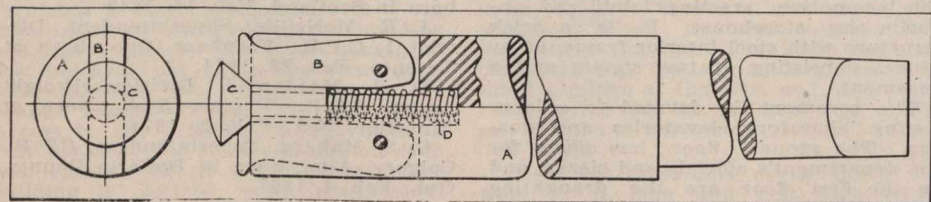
Tool for Recessing Babbitt Holes in Eccentric Straps.
